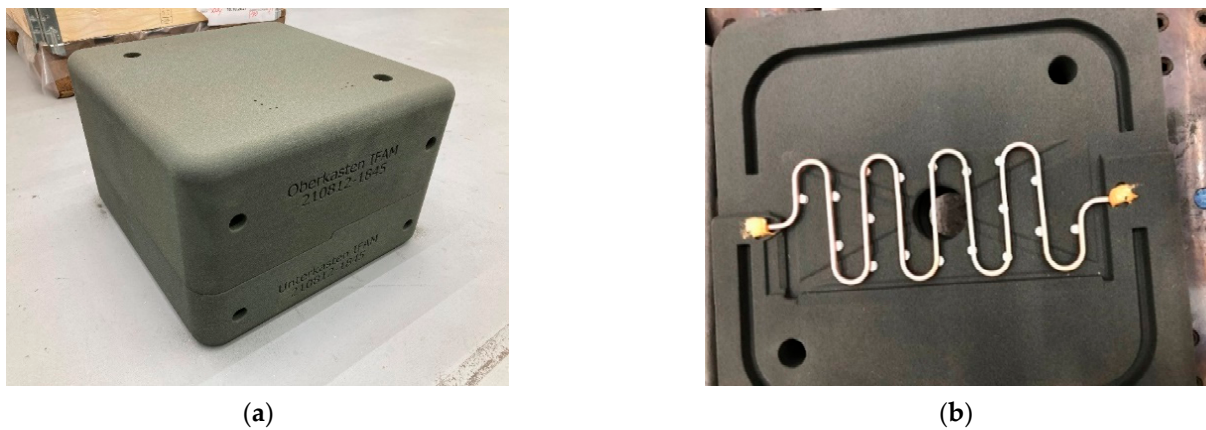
Core package made of 3D-printed sand, in two parts. (a) Top and bottom box assembled; (b) copper cooling channel positioned in the bottom box with the help of core blocks.
